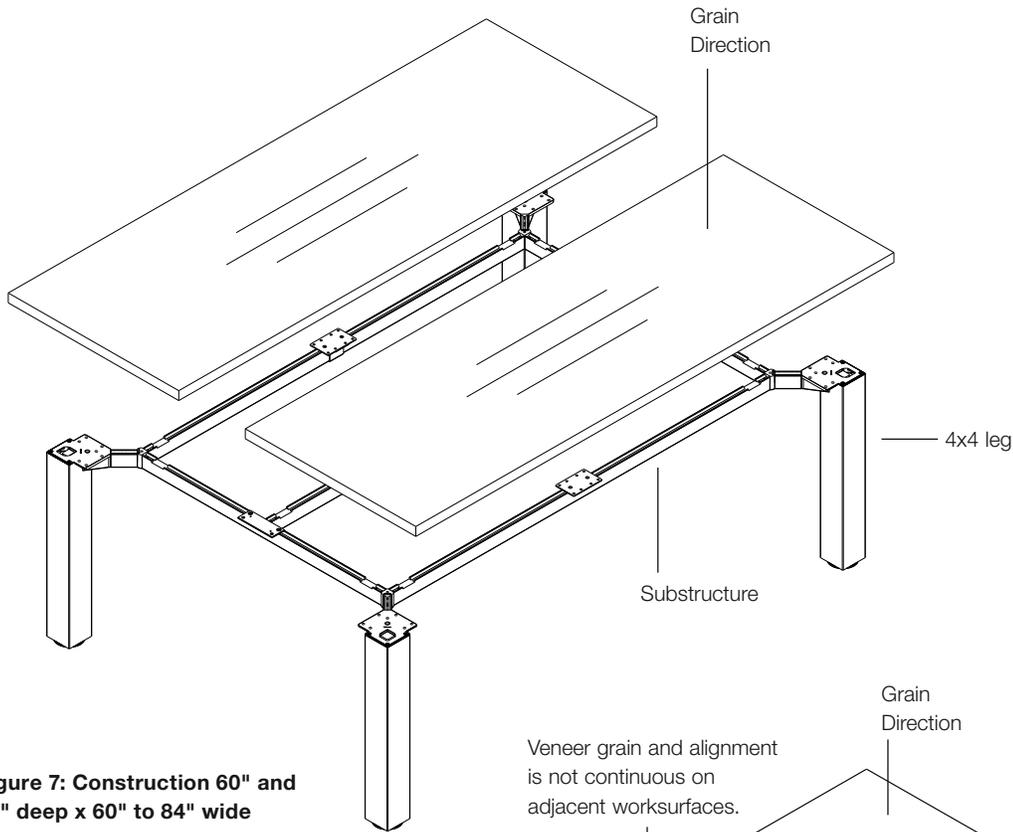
Construction 60" and 72" deep x 60" to 84" wide
